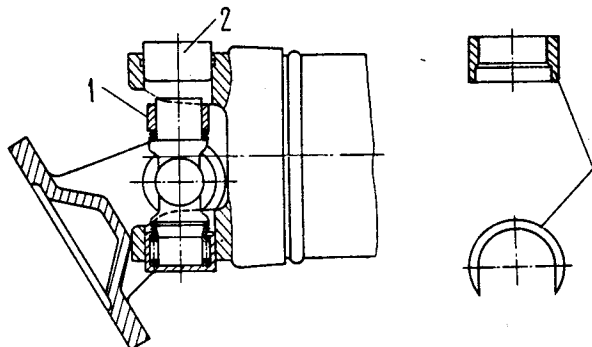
Mounting Bushing for Disassembling Universal Joint: 1 - bushing; 2 - cross bearing
